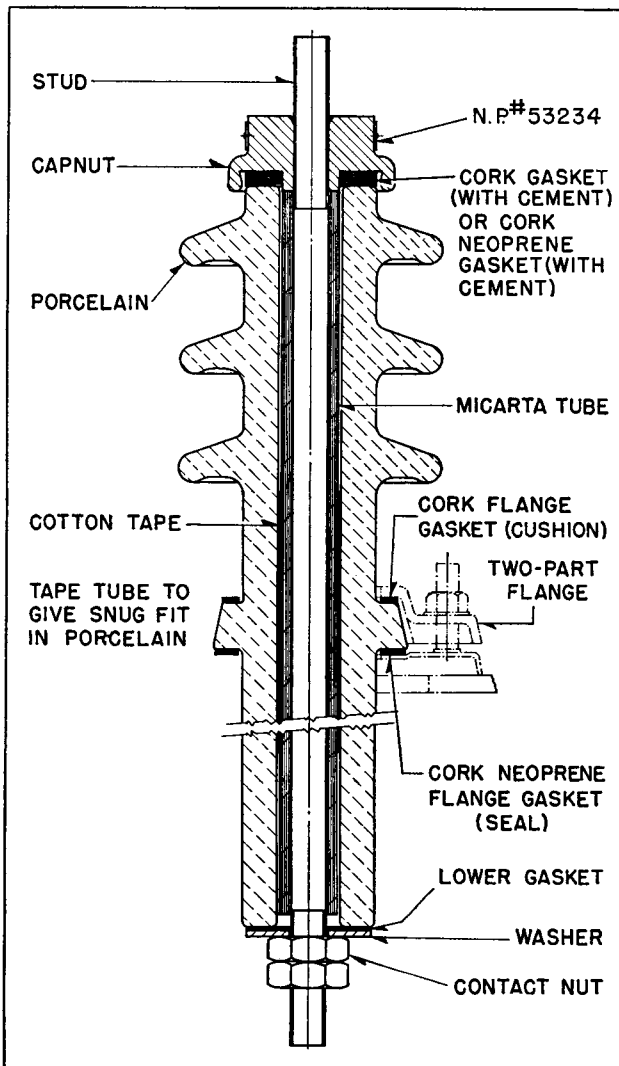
Cross Section of a Typical Bulk Type Bushing
